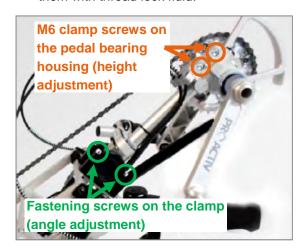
M6 clamp screws for angle and height adjustment of the pedal bearing position
